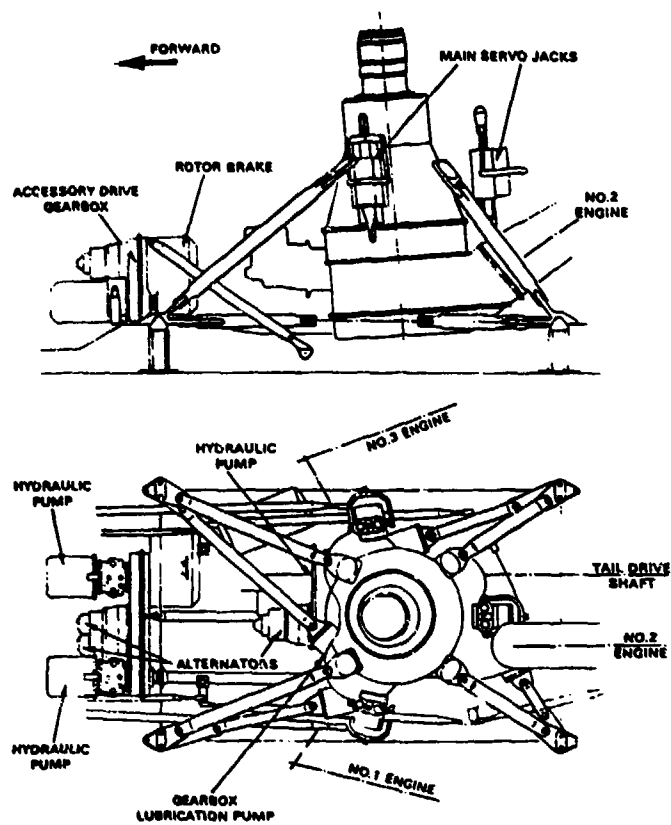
EH101 MAIN GEAR BOX LAYOUT
